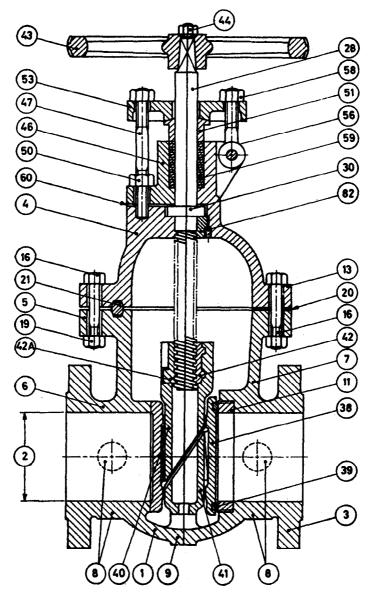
Inside Screw, Double Disk, Non-Rising Stem
